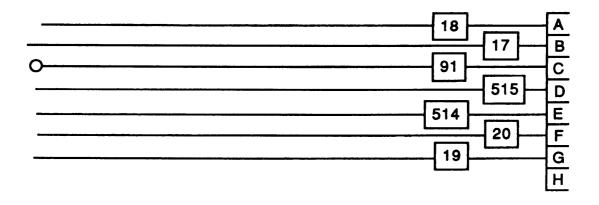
Headlight Resilient Mount Wiring Harness (10922308)
